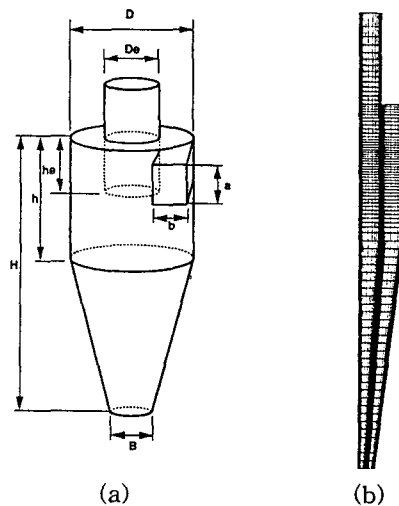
(a) Definition of geometric dimensions (b) Mesh system
